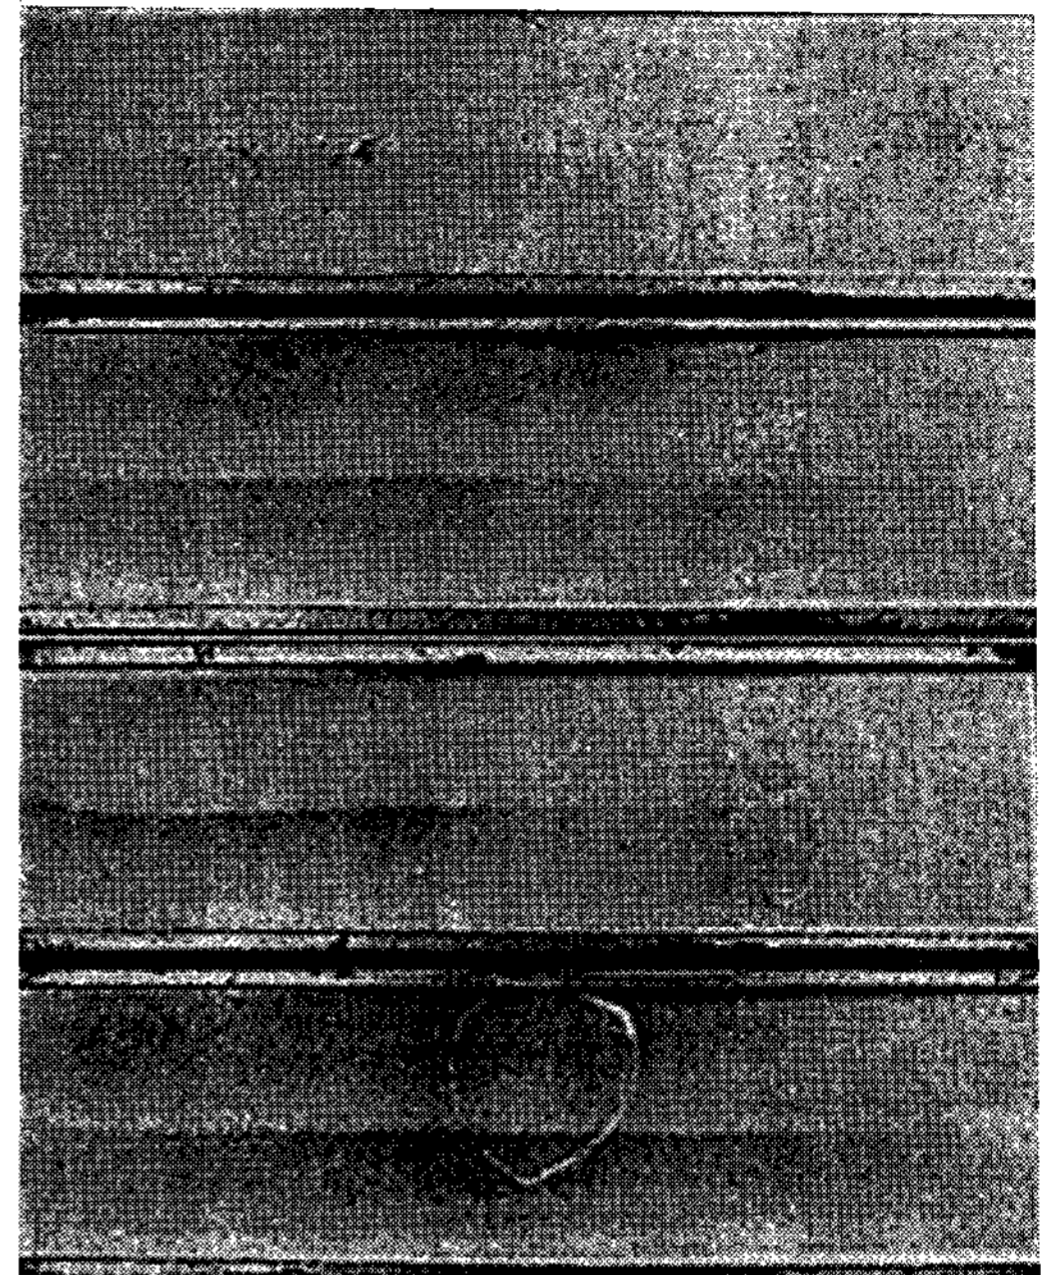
Photograph of centerline shrinkage porosity of test castings with 1.5% padding taper, cast consecutively in the mold with 2.5% taper in mold thickness, casting sequence from top to bottom.
